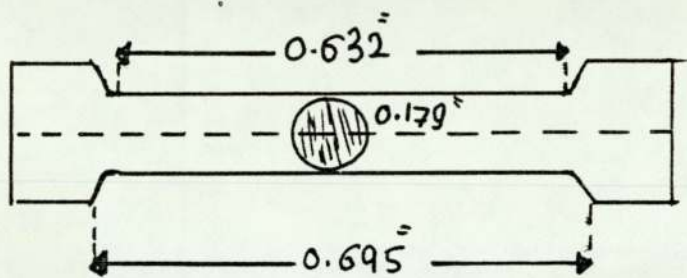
Test piece tensile test specimen No. 12" showing the dimensions and the cross-sectional area "A"
